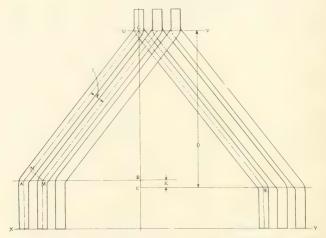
DEVELOPED VIEW SHOWING ENDS OF THREE COILS
